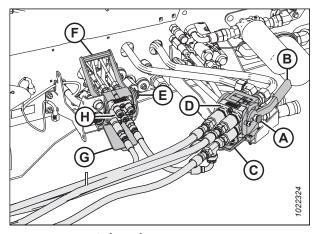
Knife/Reel/Auger Drive Multicoupler
